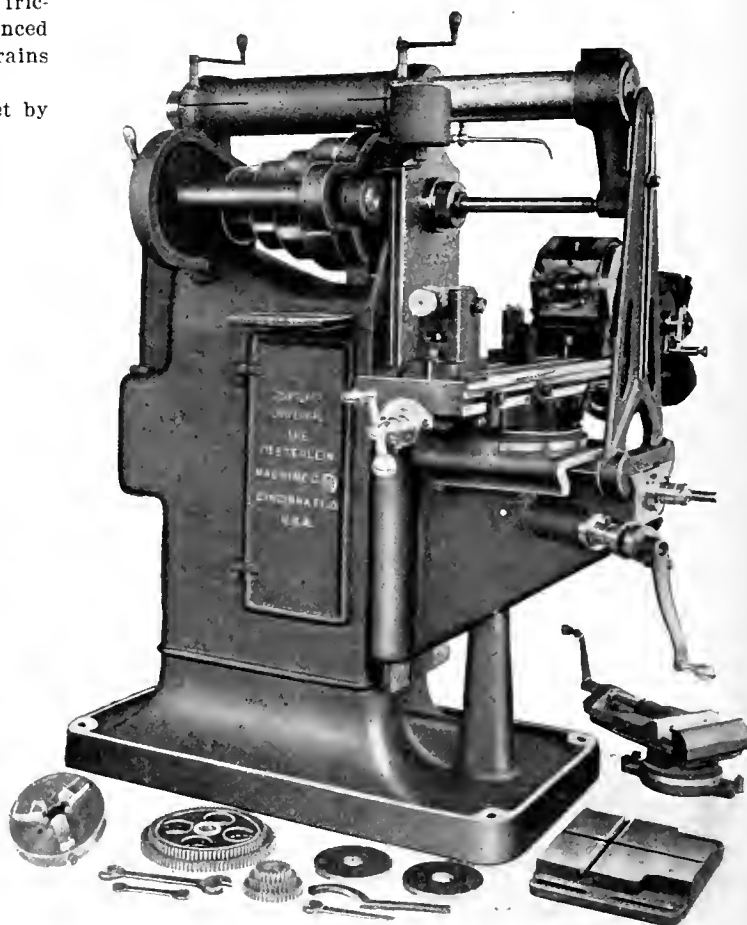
No. 25 Oesterlein Universal Milling Machine
